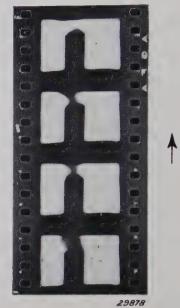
X-ray photograph of the transfer of material from a thinly coated welding rod to the piece of work in the manner indicated in fig. 3.
